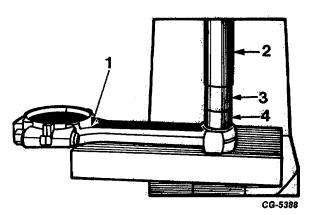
Using SE-2539 Tool to Install New Connecting Rod Bushing
